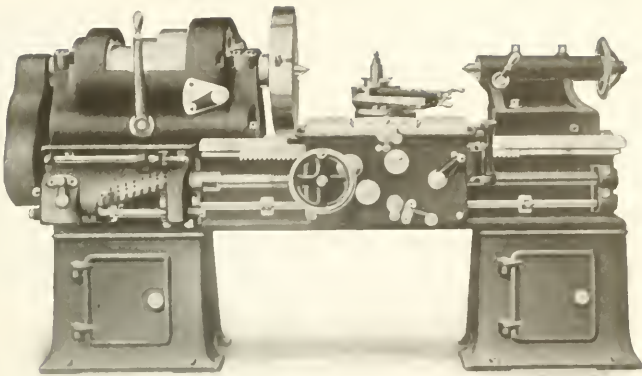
Rahn 18-inch Engine Lathe equipped with Three-step Cone Pulley and Double Back-gears
